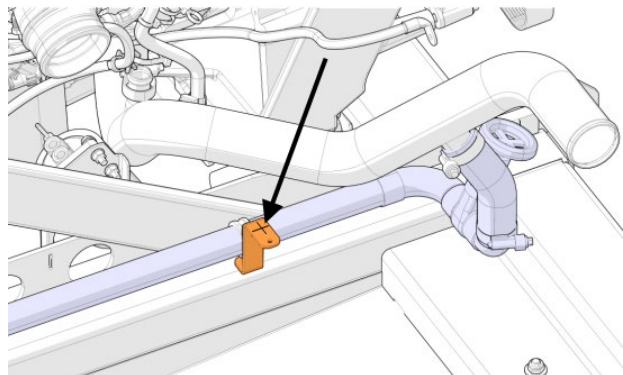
BRACKET ON THE ENGINE HOT SIDE
